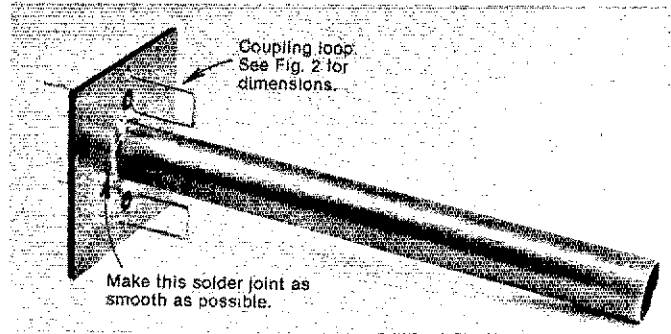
This photo shows the finished tube support assembly with both coupling loops in place. Make sure the solder joint at the base of the tube is as smooth as possible.
